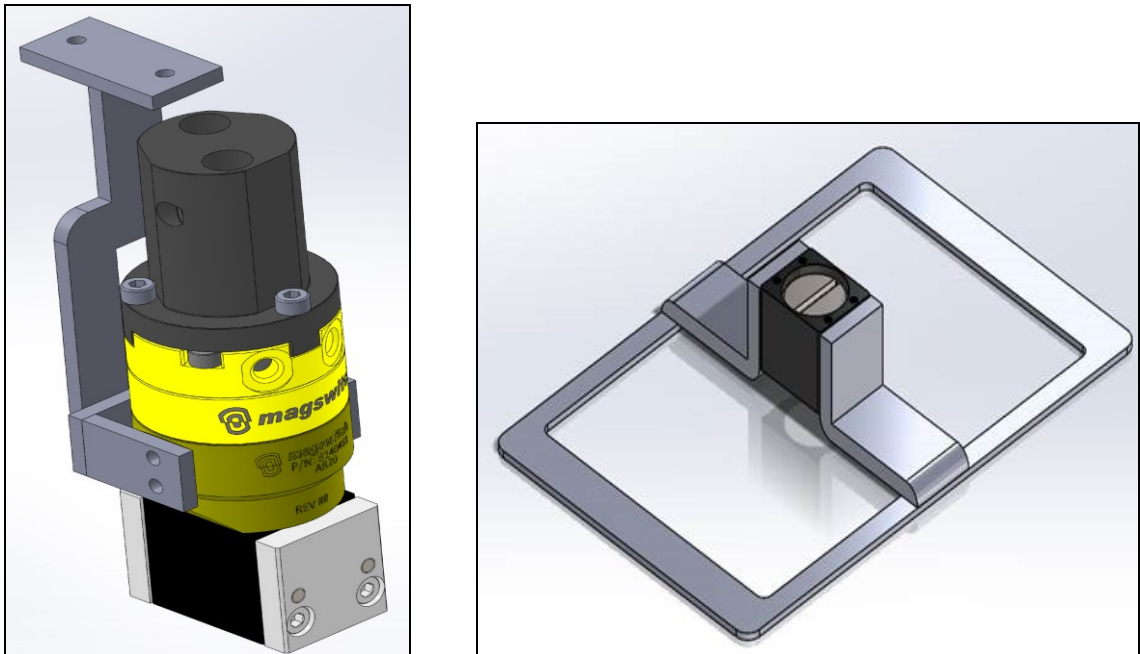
Magnetic gripper with attachment to integrate with tool holder (left); the pole shoes (gripping surface) for the gripper with the paper clamp (right)
